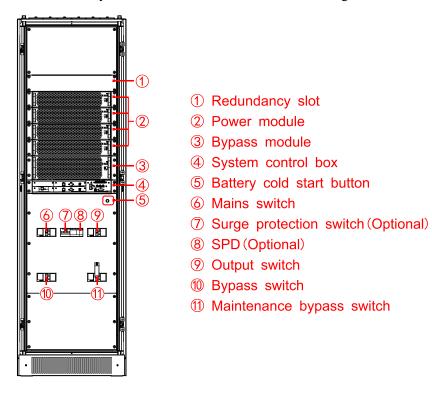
Structure layout of IST 6 120 KVA (open front door)
